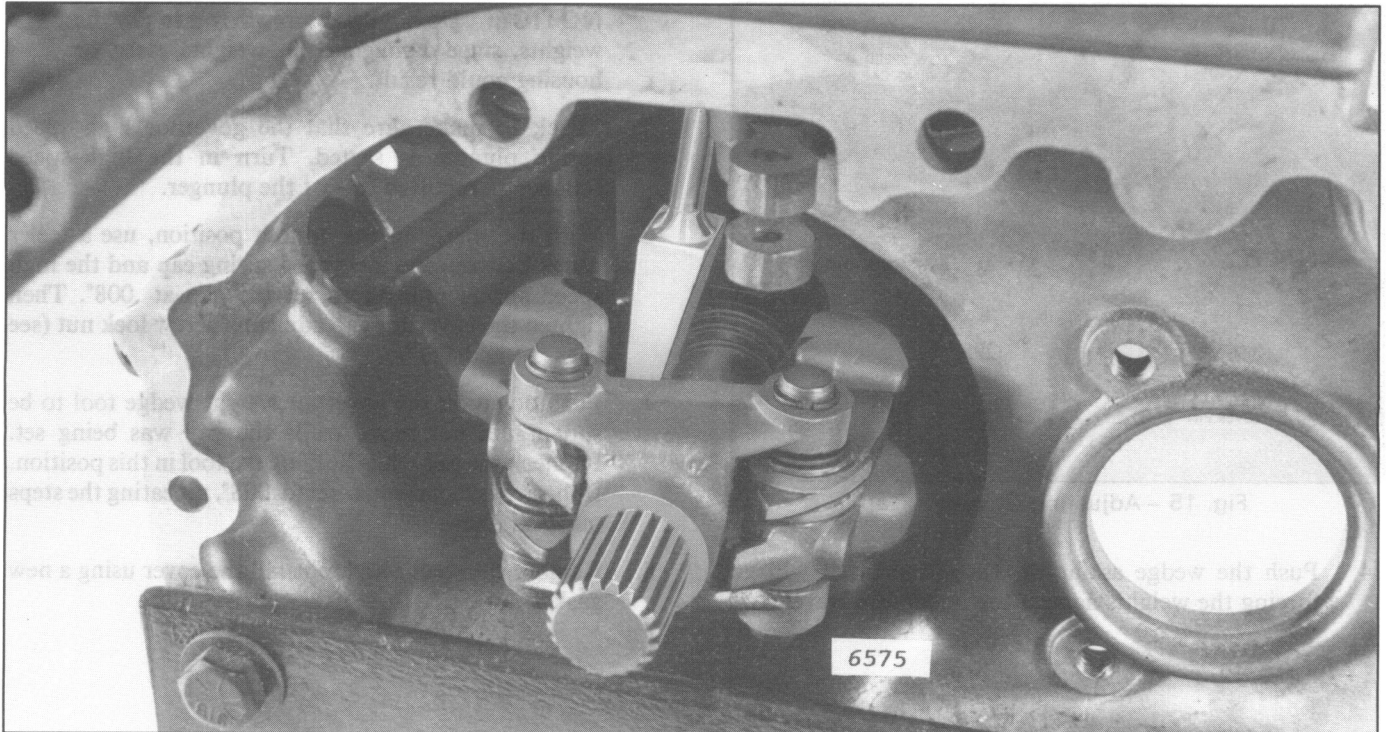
Wedge of Tool J35516 Between Riser and Low Speed Weight (Detail)
